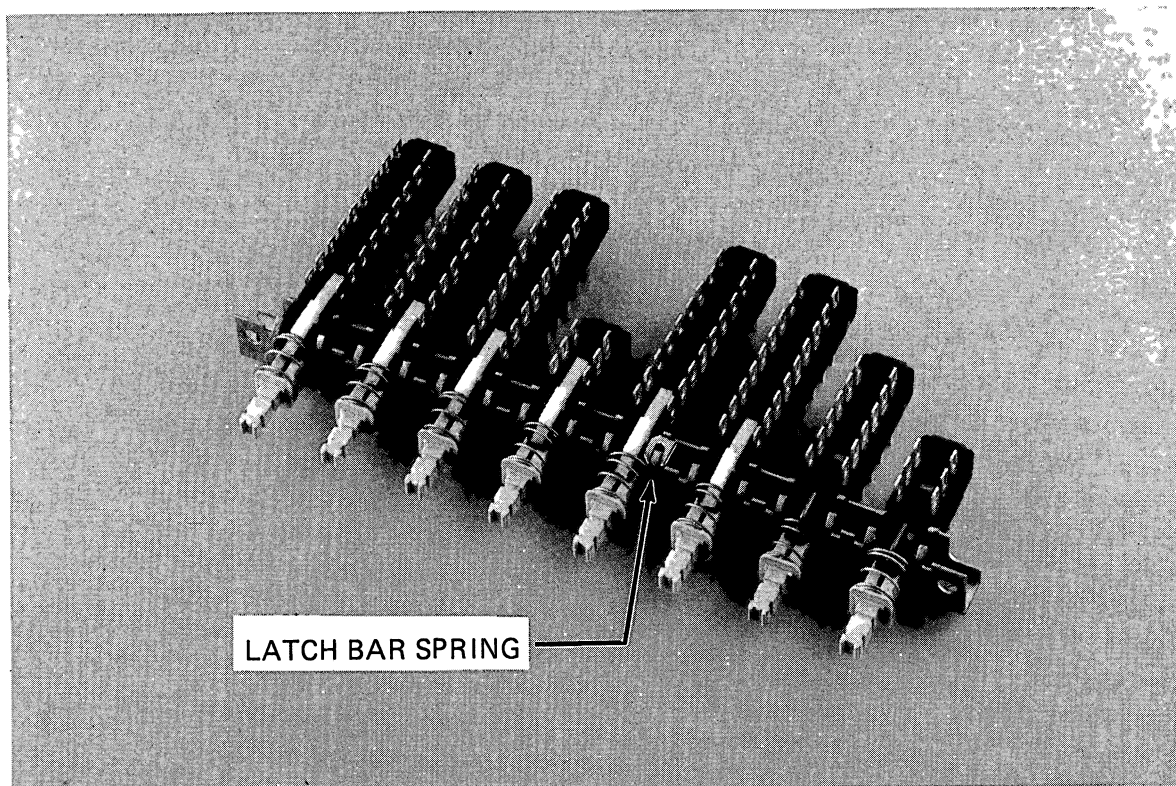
BANDSWITCH ASSEMBLY (PART NUMBER 85-1403)
